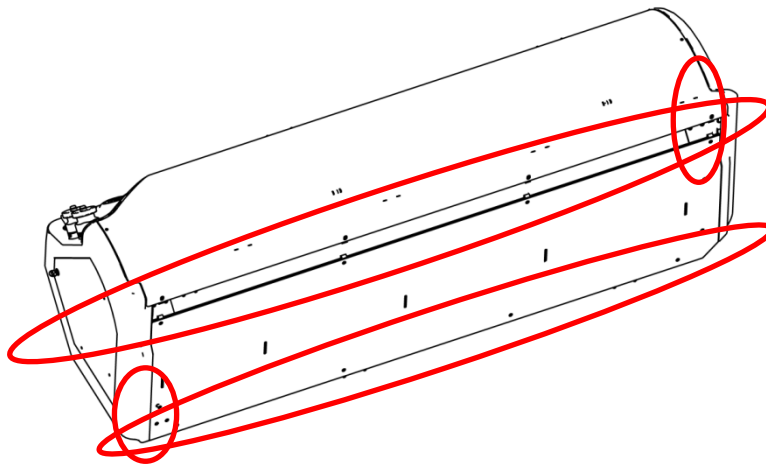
Side mount systems: Working under the vehicle, remove the bottom cover to gain access to the PRD and trigger line.
